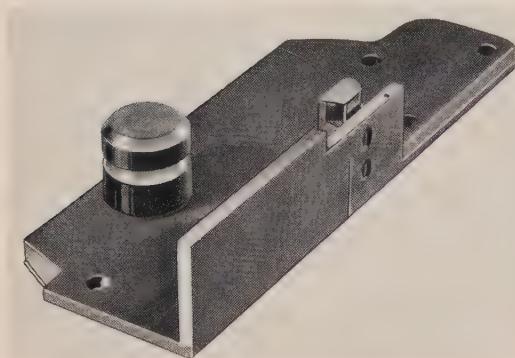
Projection-welded window fitting. Bolt and stop are attached to a bracket by welding
